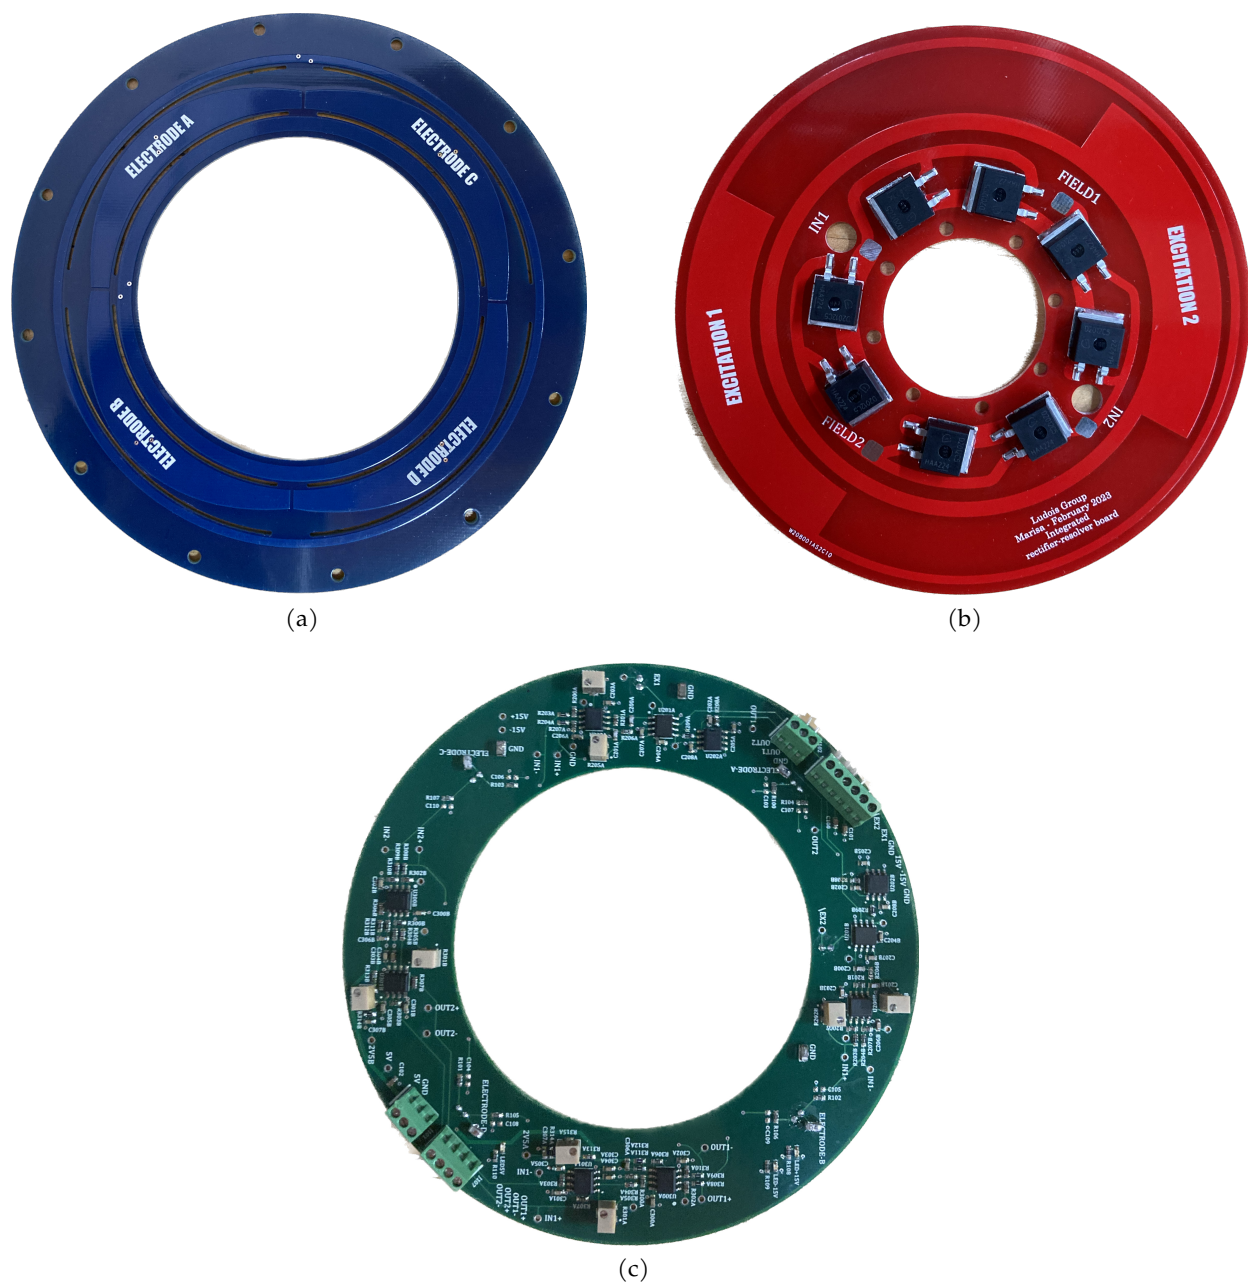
Pictures of the final resolver boards: (a) stator board, (b) rotor board, and (c) filter and demodulation board.
